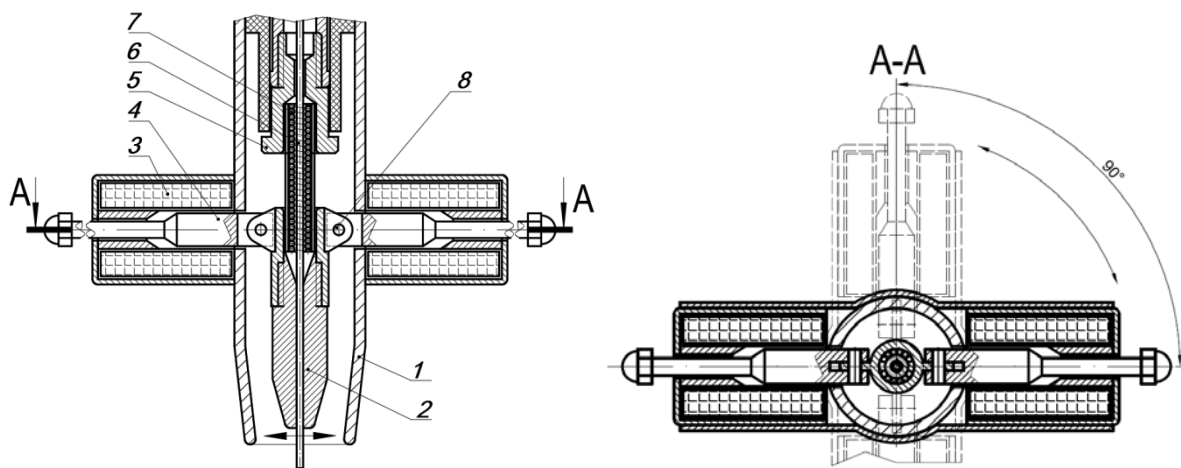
The design of the torch for automatic welding in the environment of protective gases with intra-nozzle oscillations of the electrode wire: 1 – nozzle; 2 – tip; 3 – electromagnet; 4 – stock; 5 – insulating tube; 6 – electrode wire; 7 – spiral metal tube; 8 – hinge
